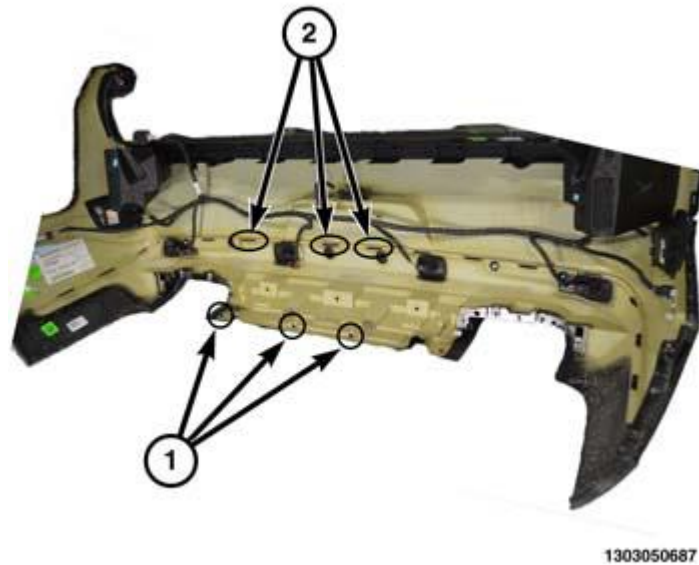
Lower Fascia Push-Pin Fasteners & Upper Clips
